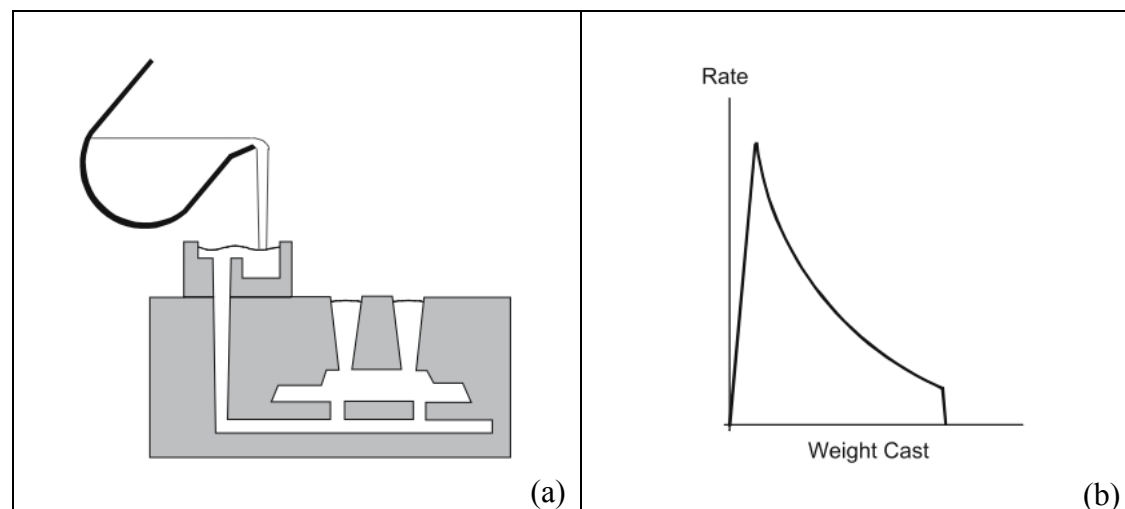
(a) Pouring stage in gravity die casting; (b) fill rate defined by mould geometry.
